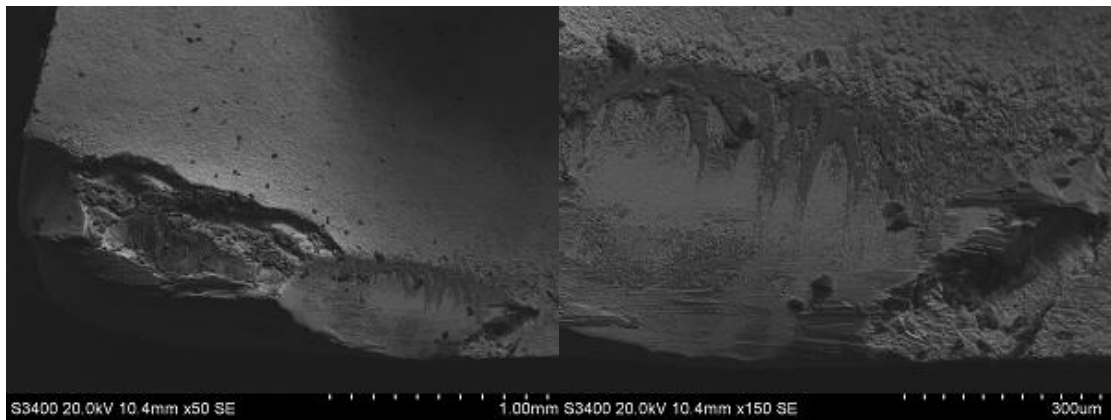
SEM image of cutting tool when cutting speed is 120m/min and feed rate is 0.30 mm/rev (left) and amplified part (right) after machining 20 cm<sup>3</sup>
